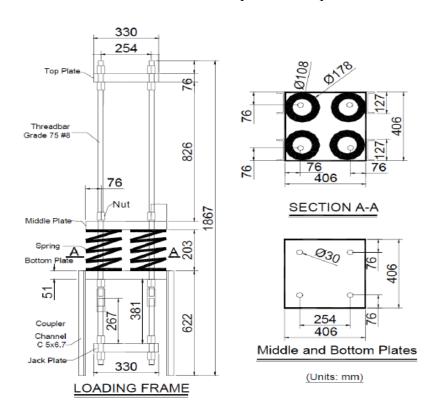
Dimensions and Details of the Creep Loading Frames [21]
